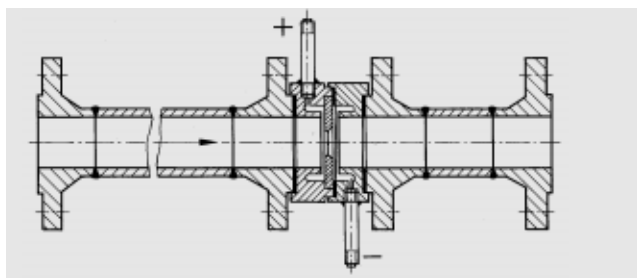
/137 Metering pipe for installation between flanges, with flanged orifice plate
